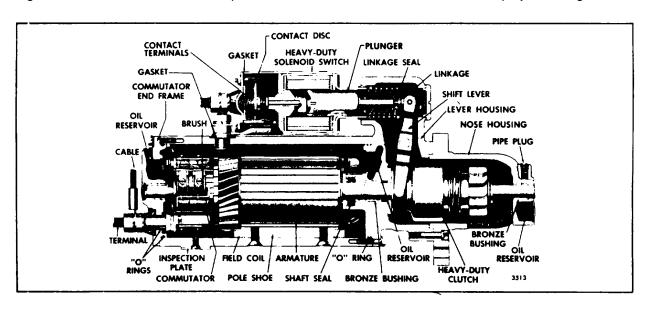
Cross-sectional View of Motor with Sprag Heavy Duty Clutch
